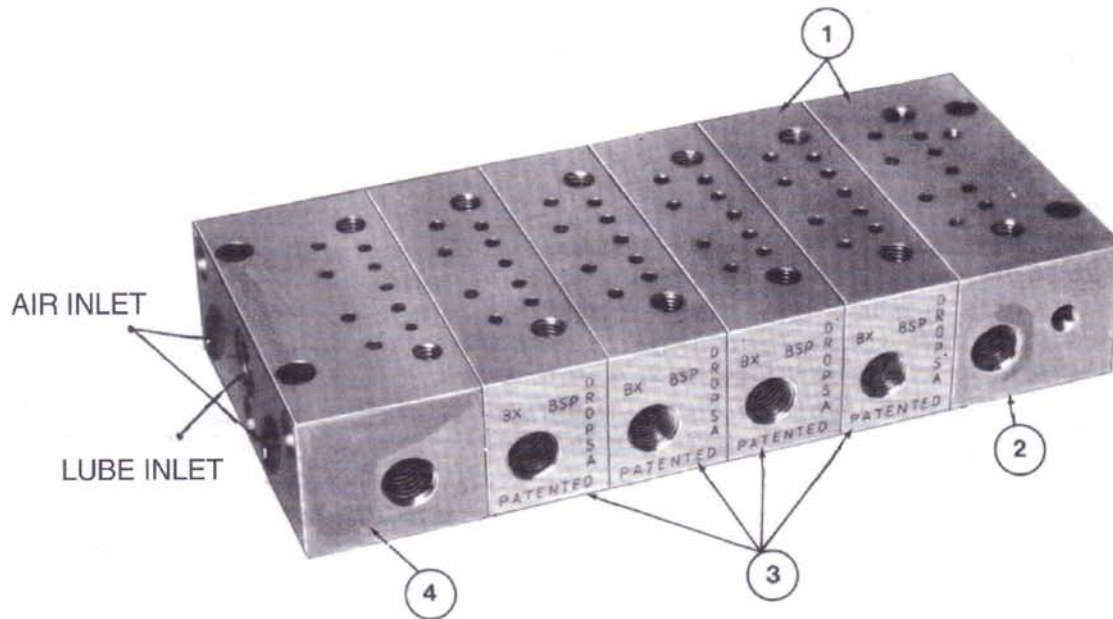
RED BASE ASSEMBLY FOR SIX METERING ELEMENTS
